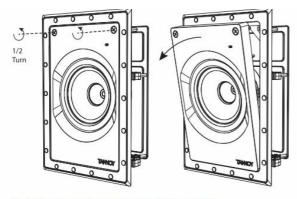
Removing the Loudspeaker Assembly from the Frame
